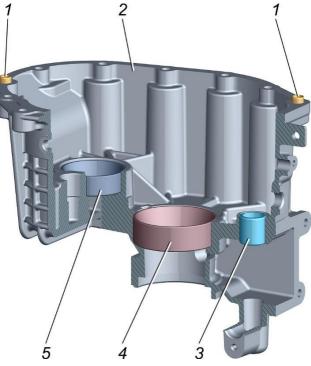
Gearbox rear housing: 1 – locating grommets; 2 – rear gearbox housing; 3 – linear motion ball bearing; 4 – secondary shaft bearing cage; 5 – countershaft bearing cage
